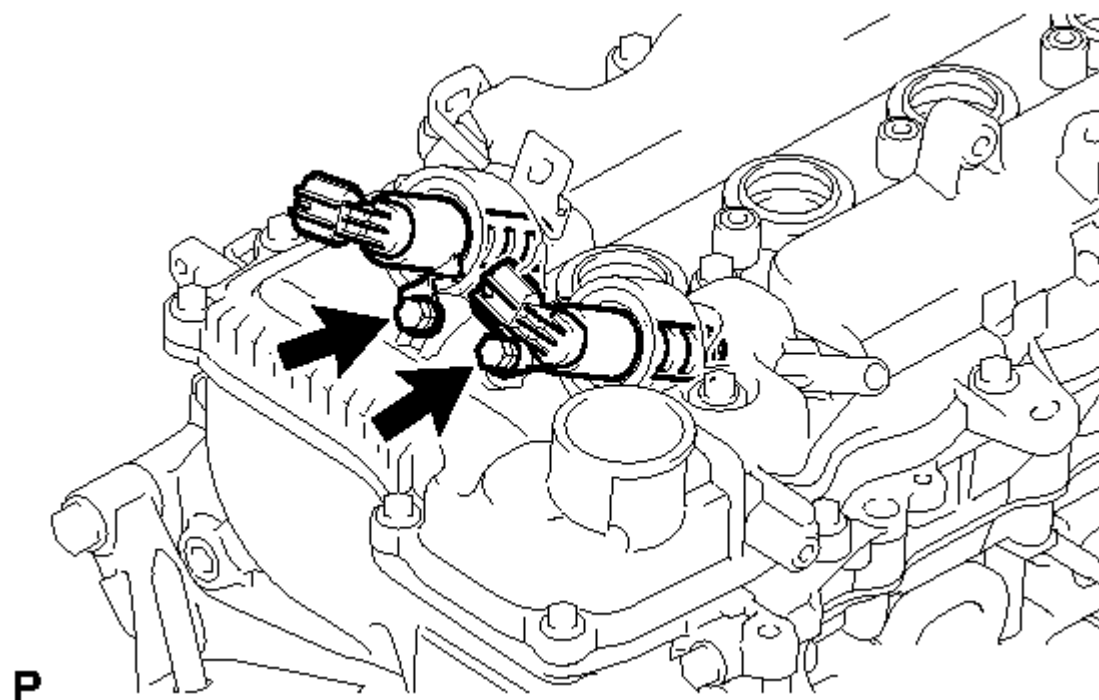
Identifying Camshaft Timing Oil Control Valve Bolts
